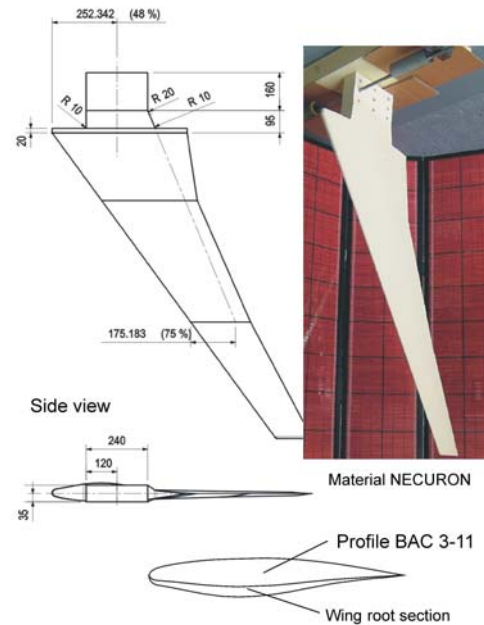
Wing model geometry 1st design and CNC 1:1 milling from a view model material (top right)
